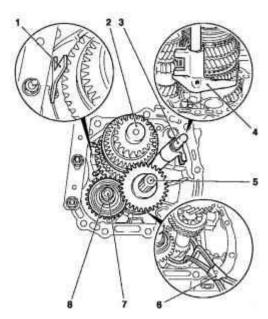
Removing the components of the switching mechanism of reverse gears: 1 - plate 2 - retaining rings of the main shaft, 3 - gear shift fork rod 1 st / 2 nd, 4 - gear shifting fork 5 - a drive shaft; 6 - a special tool, 7 - axle gear reversing 8 - idler reverse
